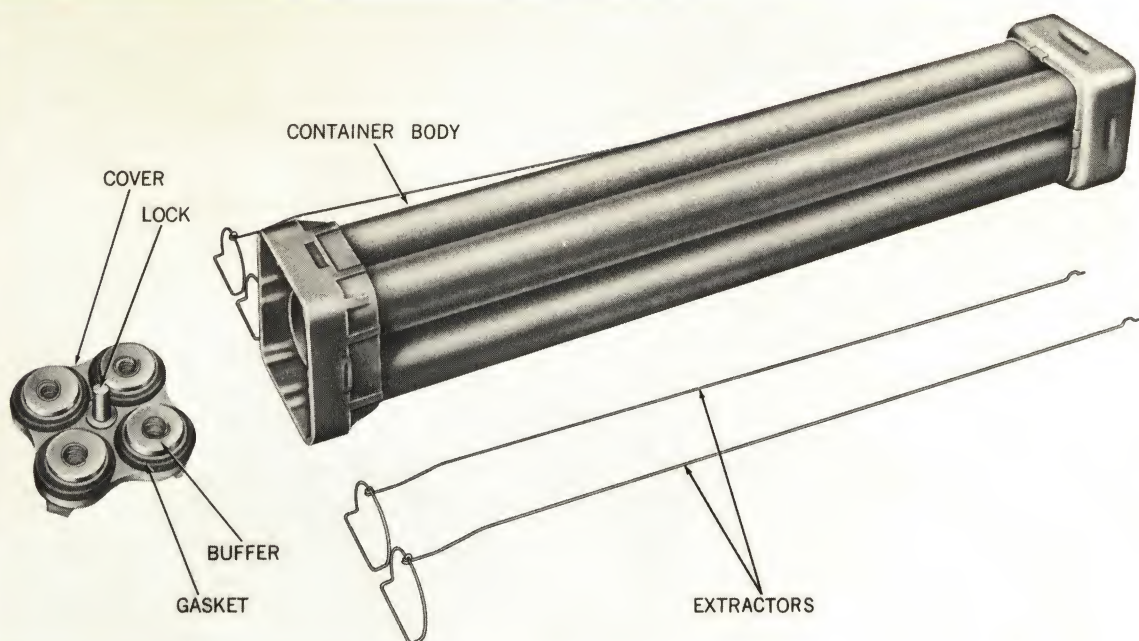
Container for Heads and Motors Shipped Together, Cover and Extractors Removed.
